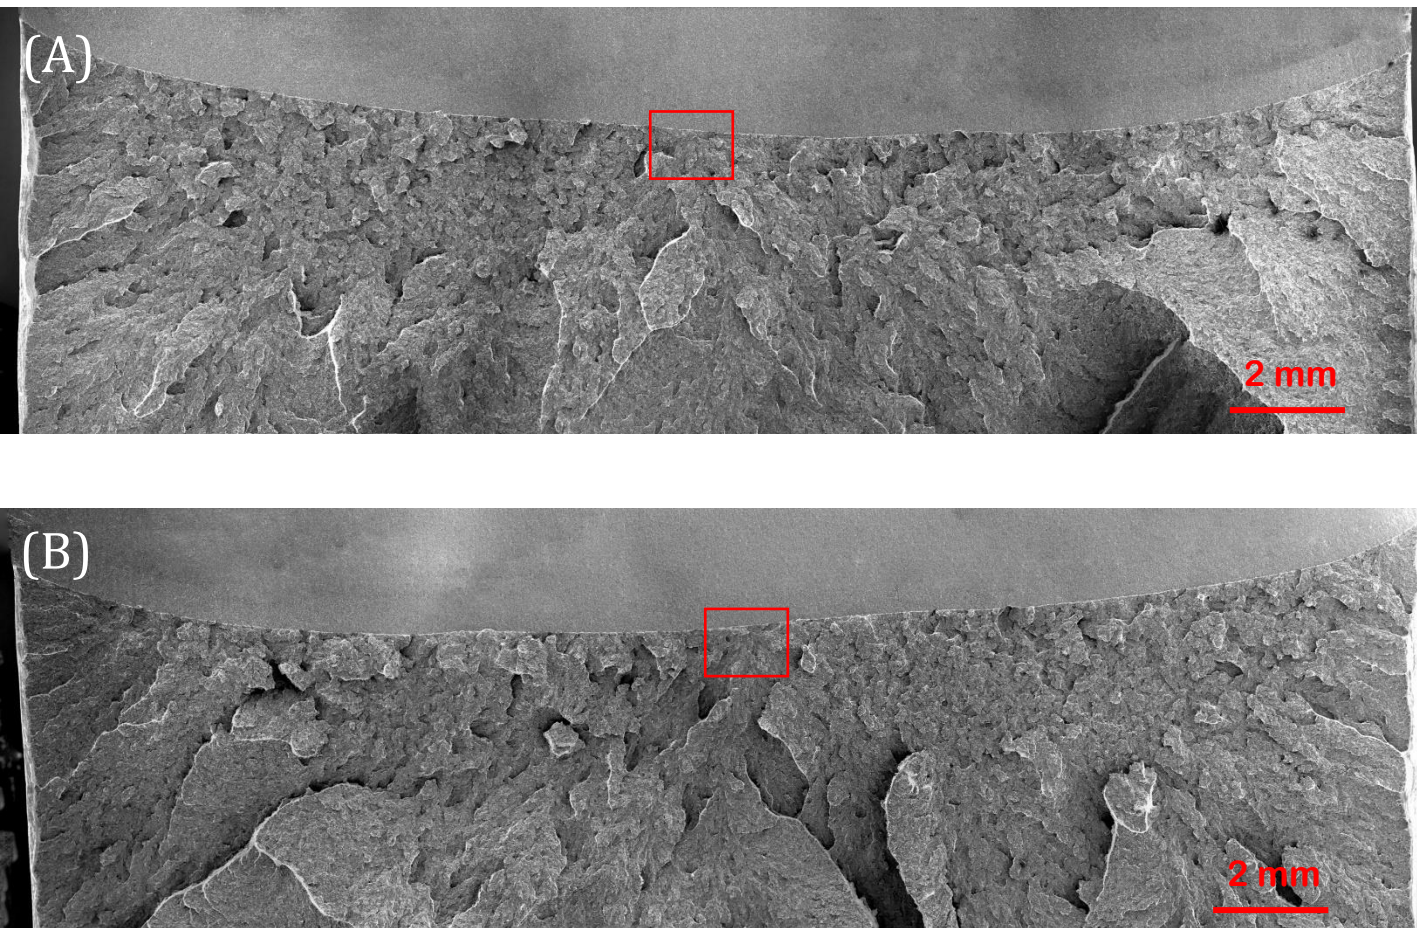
(a). Overview of fracture surfaces on a sharp-cracked specimen, designated CT HT2-09, tested at  $-100\text{ }^{\circ}\text{C}$ . Red frames on matching halves (A) and (B) denote the most probable fracture initiation areas. Test results: Critical J-integral ( $J_c$ ) value of  $36.1\text{ kJ/m}^2$ , crack tip opening displacement (CTOD) of  $0.028\text{ mm}$ , local cleavage fracture stress of  $2206\text{ MPa}$  ( $n=0.1$ ), fracture initiation distance ( $X_0$ ) of  $115\text{ }\mu\text{m}$ , and an average stable crack extension of  $8\text{ }\mu\text{m}$ .
